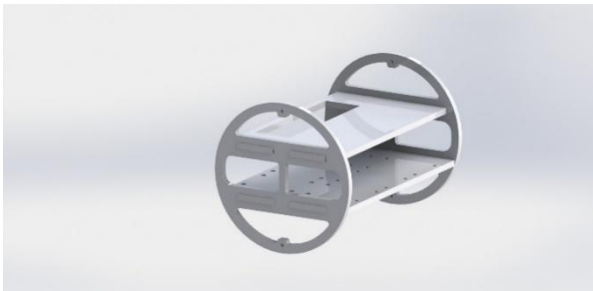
Internal shelves carrying components structure designed by Yousab Youssef using SolidWorks
